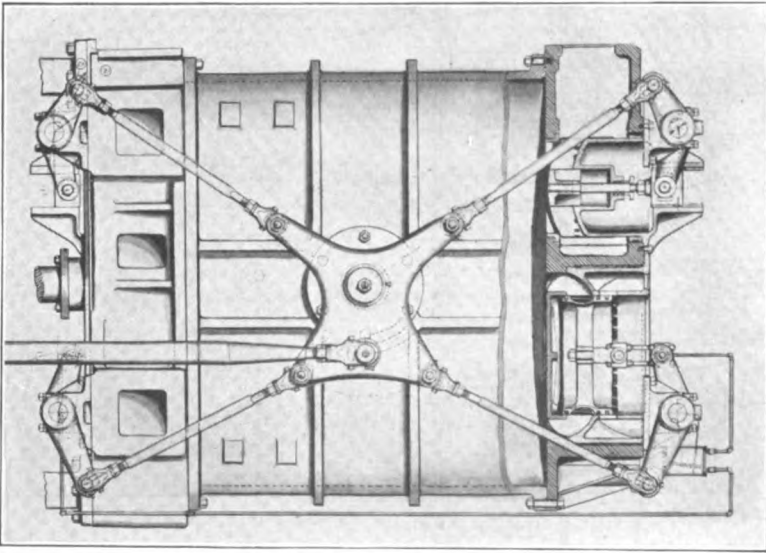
VALVE GEAR BUILT BY WM. TOD COMPANY
